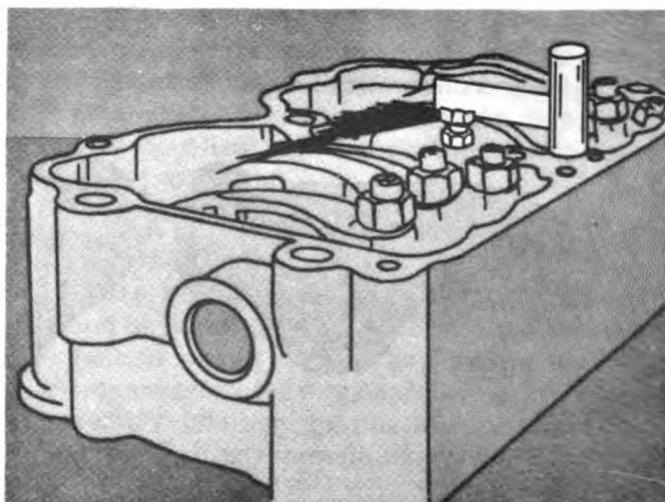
Use The ST-1182 To Adjust The Spray Nozzles.
